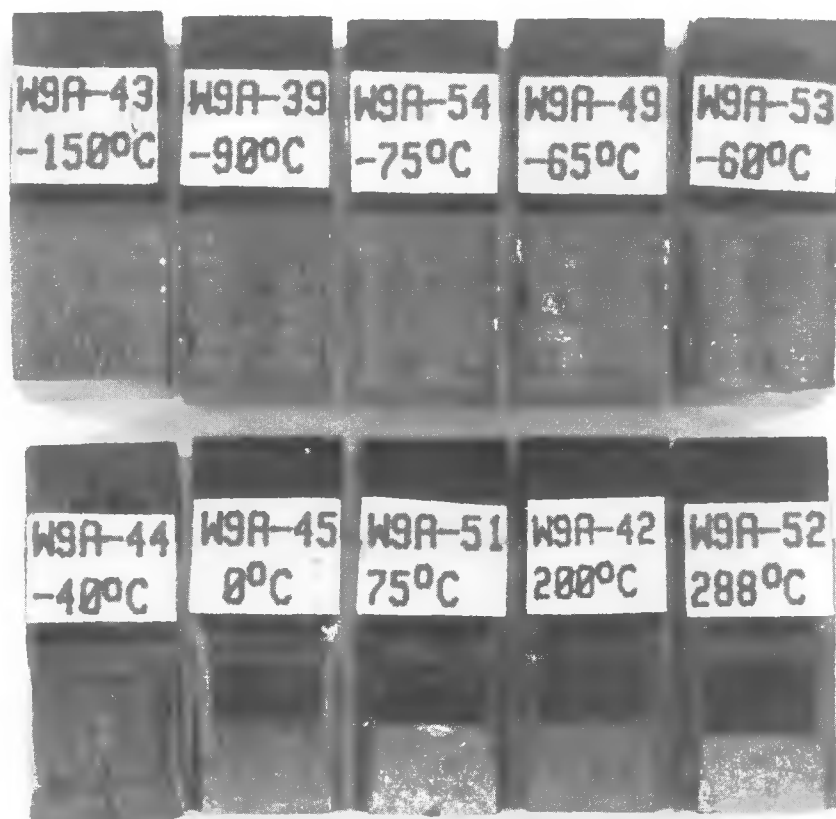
Fracture surfaces for the Linde 0091 weld (W9A), in the unirradiated condition.
